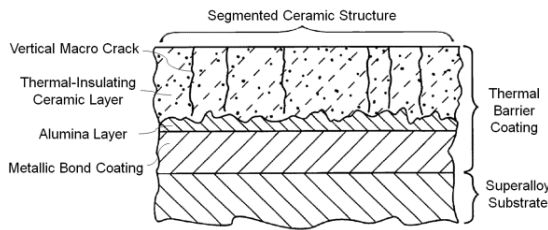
Cross-sectional view of a gas turbine blade using DVC technique<sup>5</sup>
